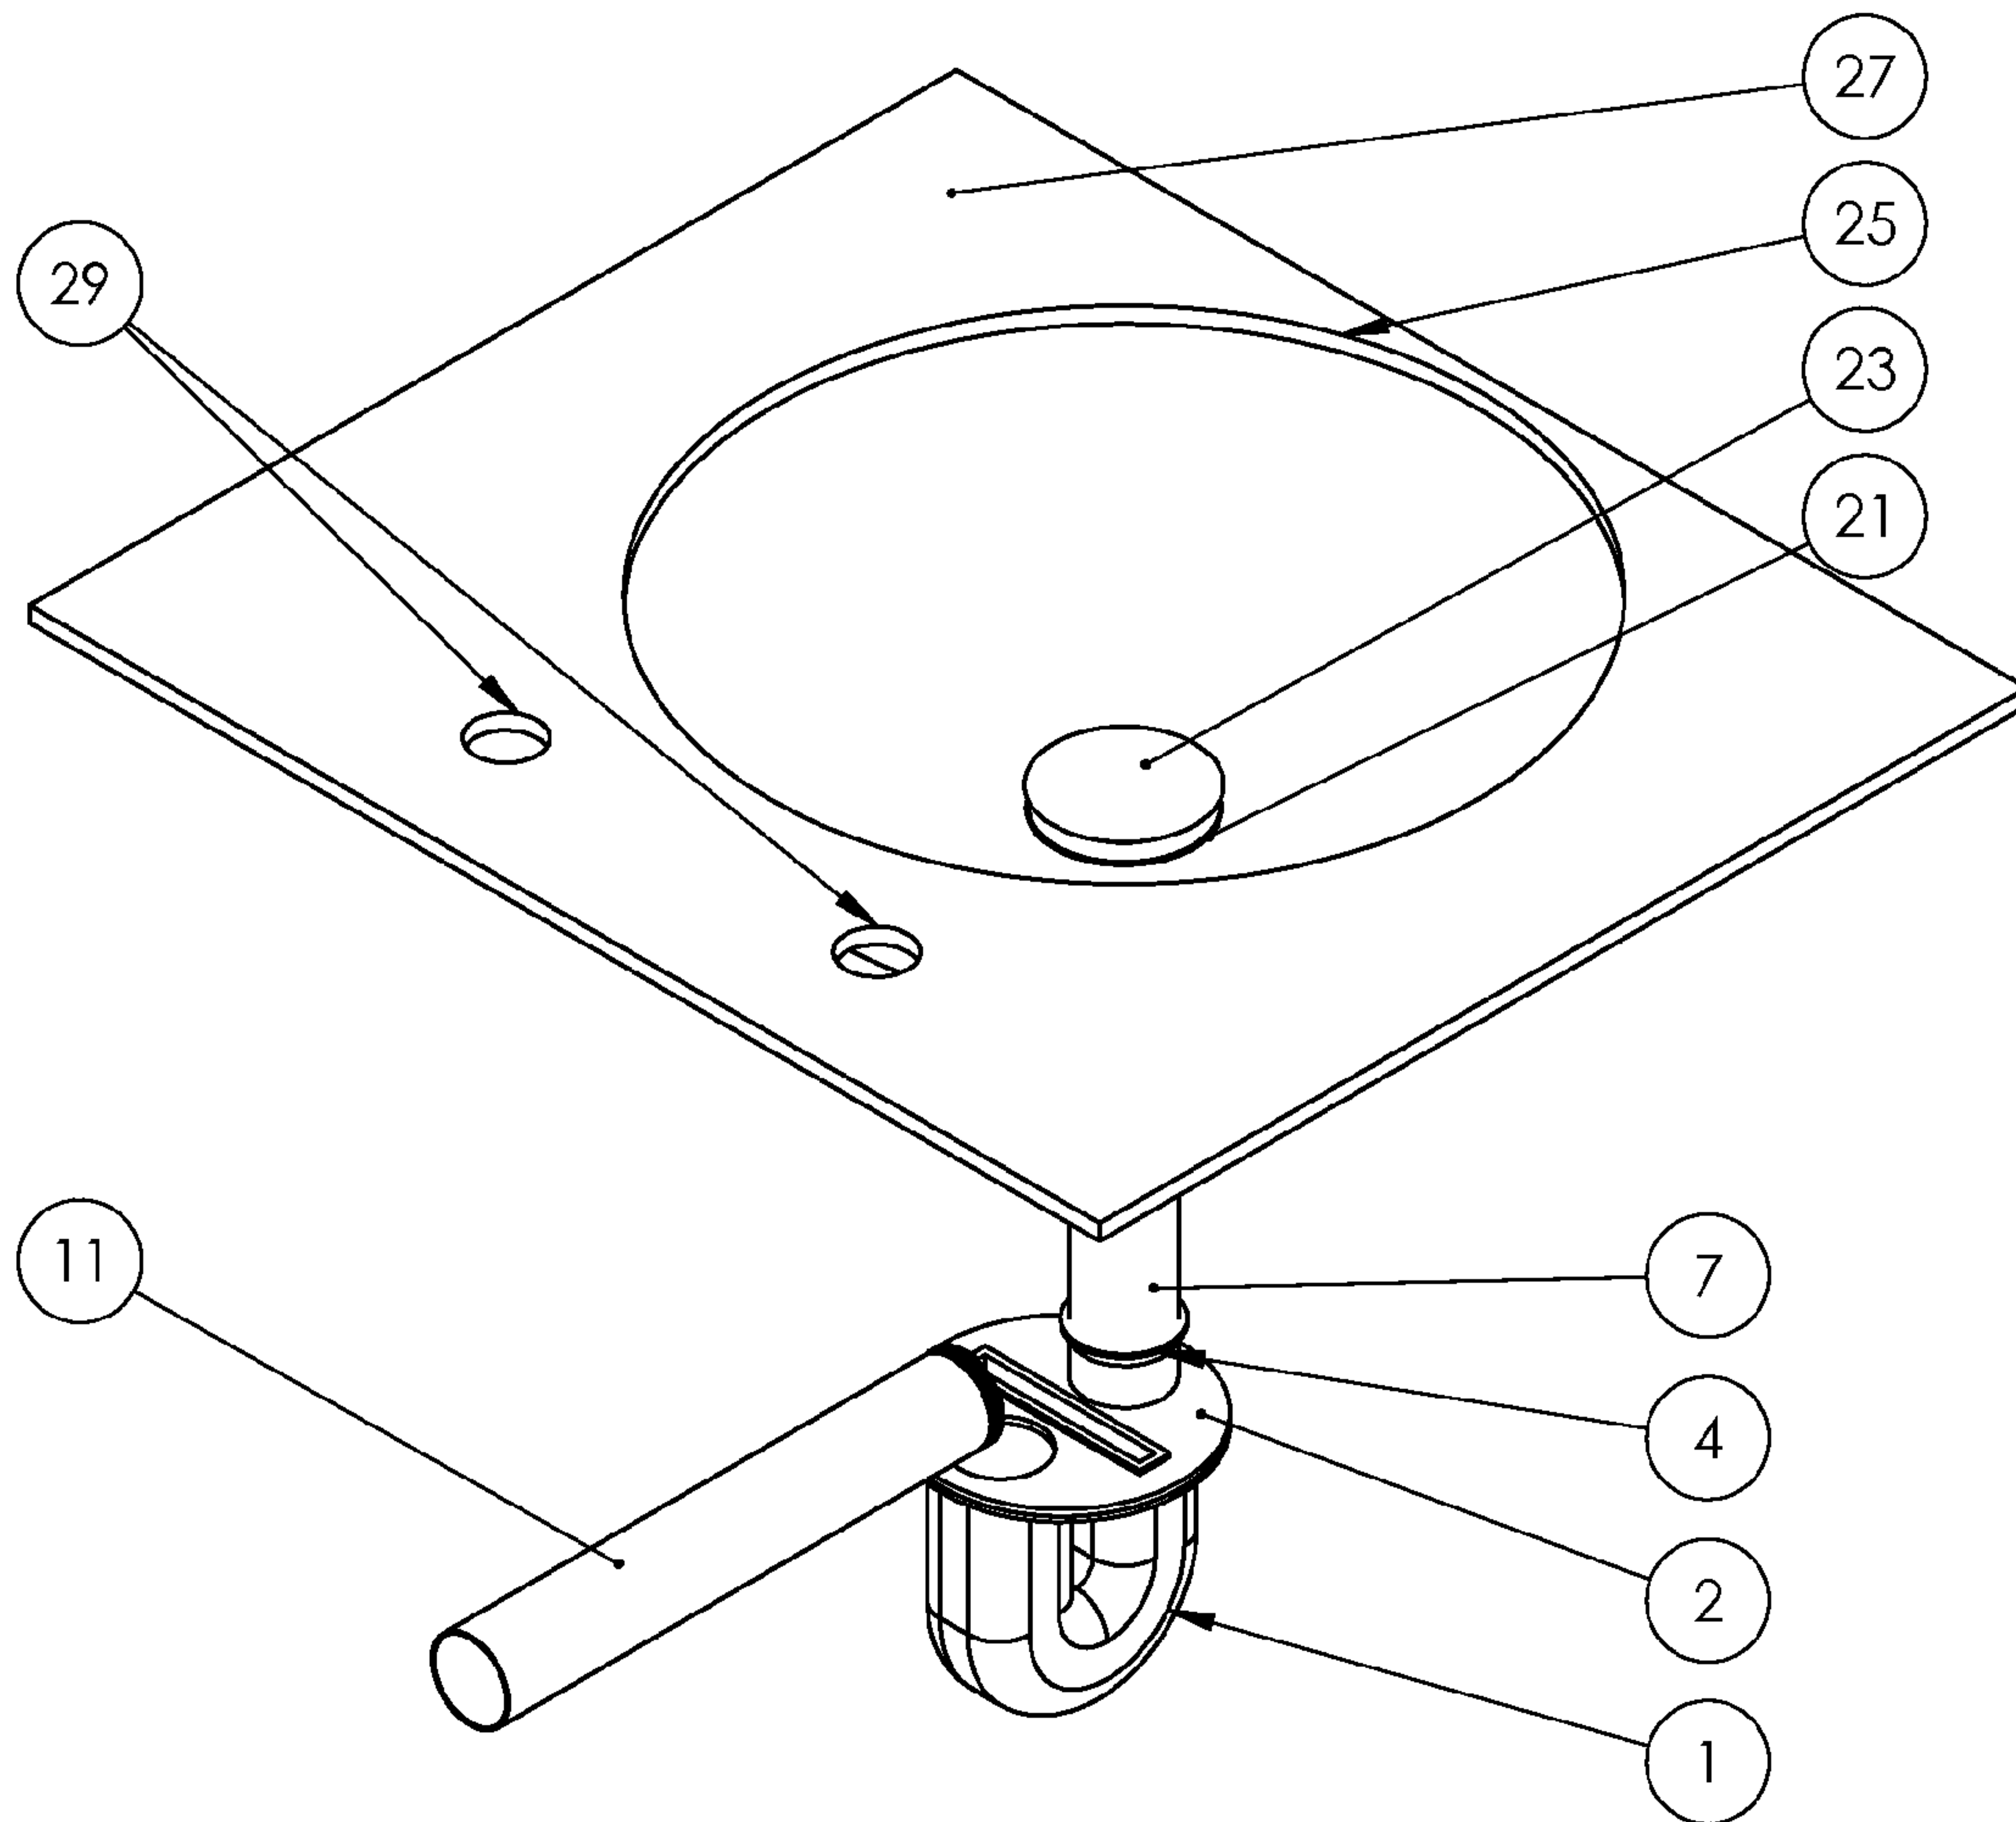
Isometric view of removable trap system showing drain, tailpiece, waste arm, tubular trap, and seals.
